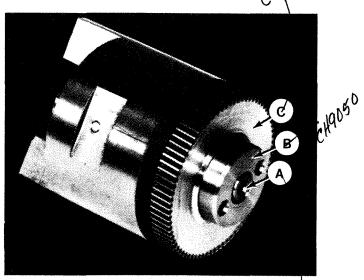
Worm Wheel and Drive CHAIIILA Cartridge
